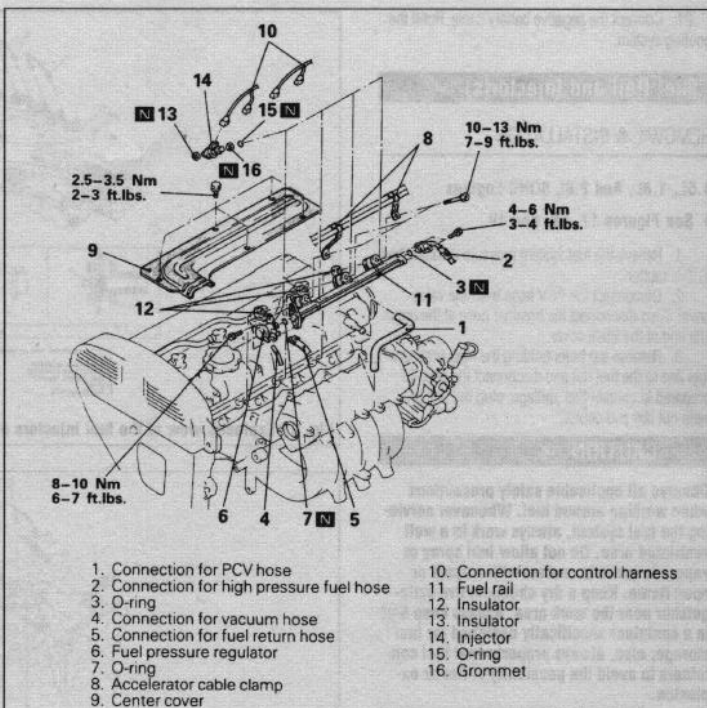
Exploded view of the fuel injectors and related components — 1.6L and 2.0L DOHC engines
